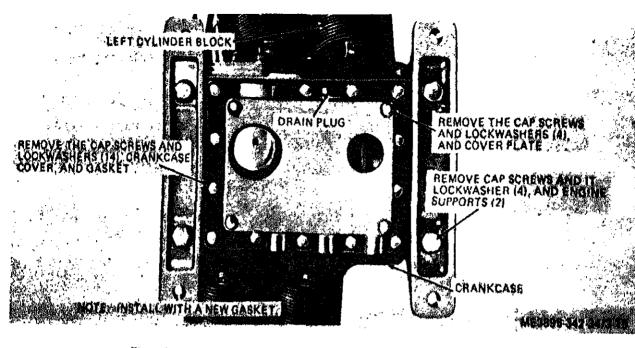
Crankcase cover plate, cover, gasket, and engine supports removal.
